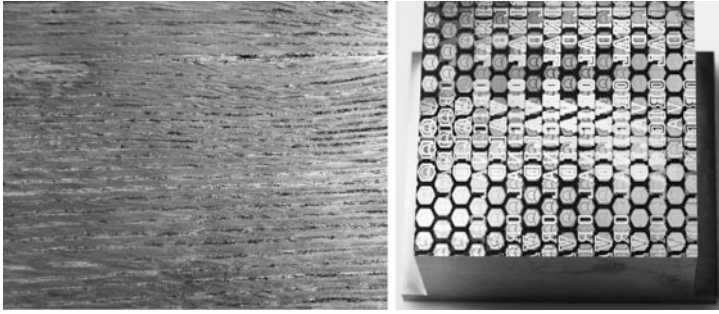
Mold plate with wood veneer embossing (*left*) and explosively embossed steel mold insert with holographic surface structures (*right*)
